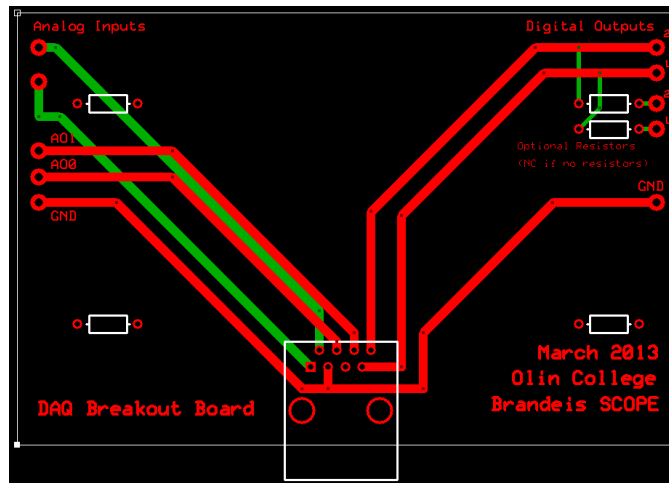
Design drawing of the custom DAQ Breakout Board, showing the top copper layer, bottom copper layer, and a silkscreen layer (not printed on the actual board).
